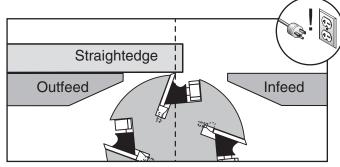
Using straightedge to ensure outfeed table height is set even with knives at TDC.
